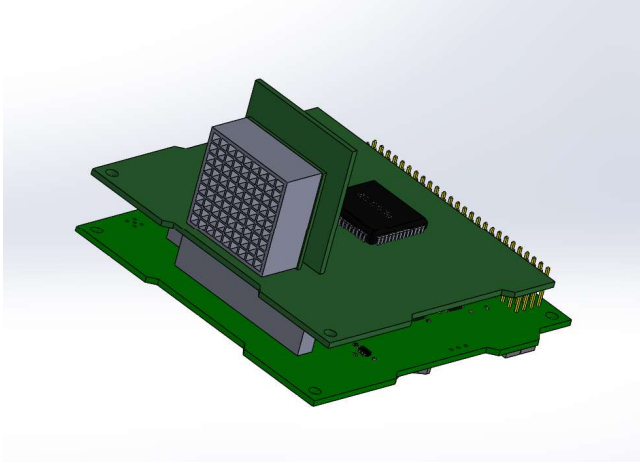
Left: Technical drawing of a possible geometry of the iXRD with the collimator. Collimator size, pixel size and placement have not been determined yet. The system consists of a motherboard at the bottom and the daughterboard at top.
